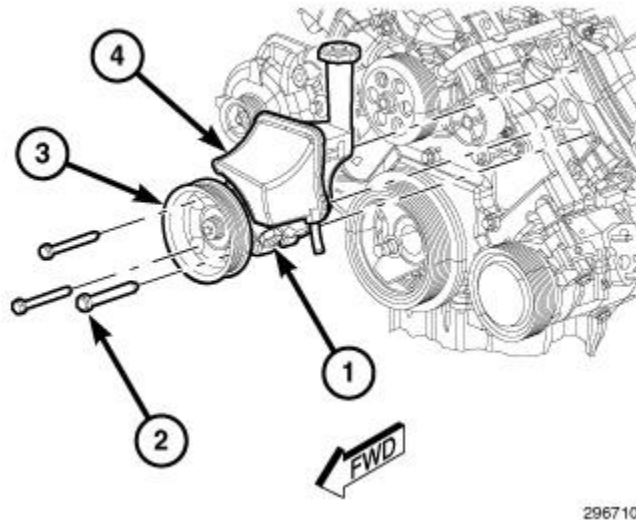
Power Steering Reservoir, Pump, Pulley & Bolts
